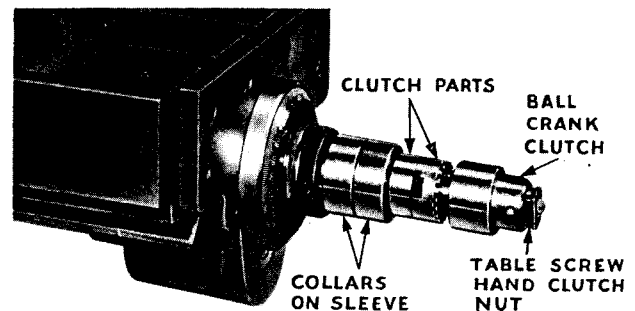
(above) and Fig. 23 (below). Parts to be removed for installing "Gear on Screw". In lower illustration the ball crank has been removed and the nut on table screw loosened.
